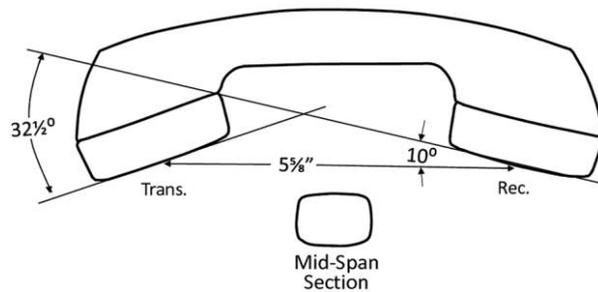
Outlines and modal dimensions, G-type handset. (Ralph Meyer.)
